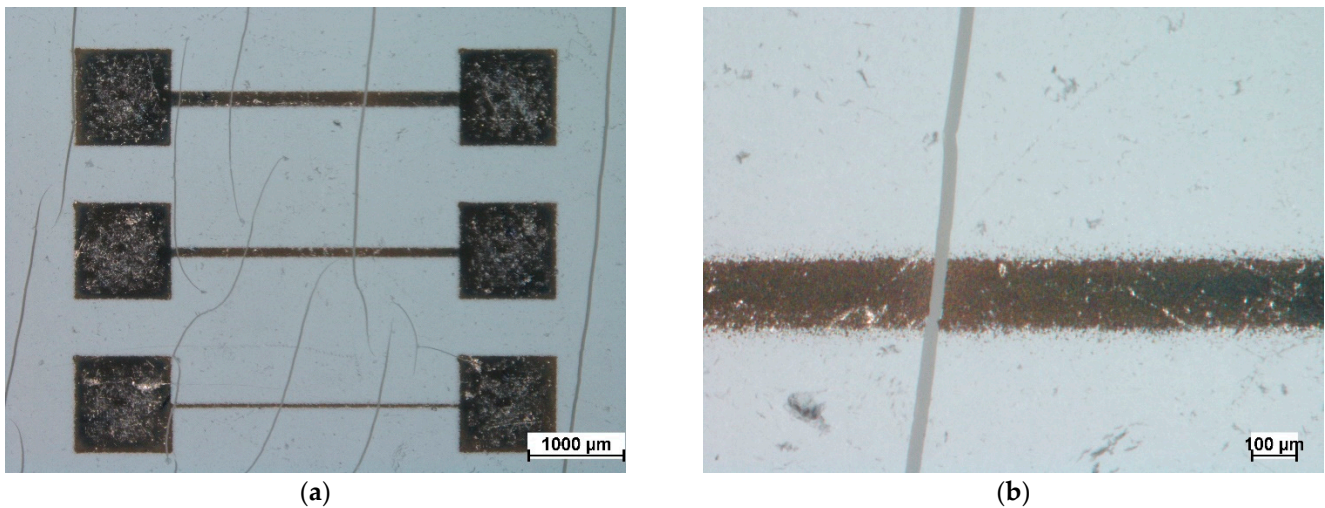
Cracks in ear mold substrate after reflow soldering with 180 °C peak temperature (a). Close-in view of crack through conductor path (b).
